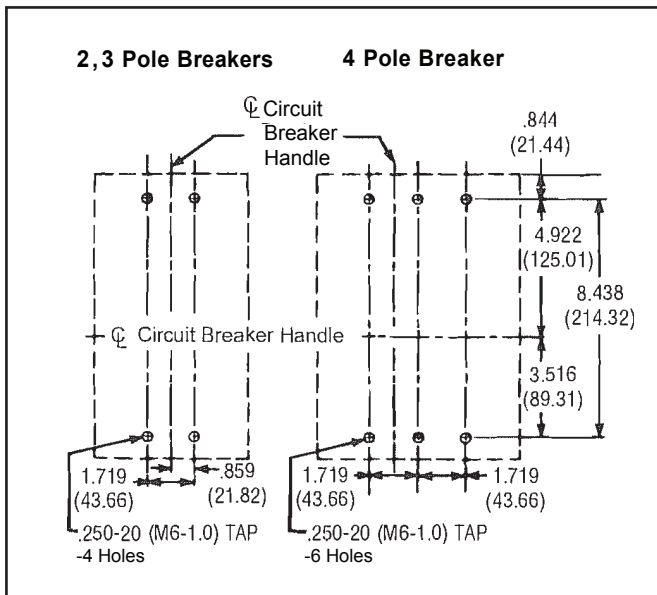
Circuit Breaker Mounting Bolt Drilling Plans
